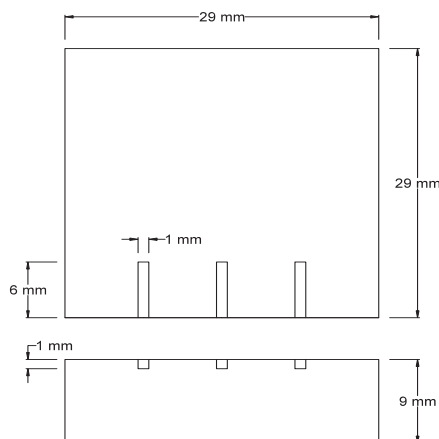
Top view of the workpiece design with 3 cavities to be machined using micro-EDM
